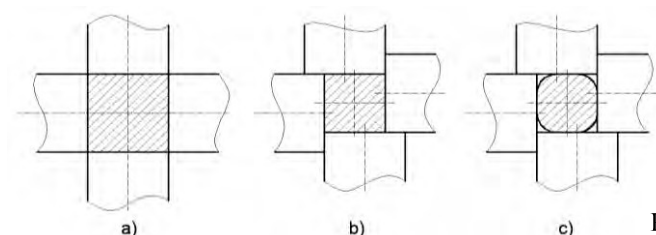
Contact area of the anvils with the forged bar at forging on radial swaging machine: a) at the beginning, b) at the end of elongation.
